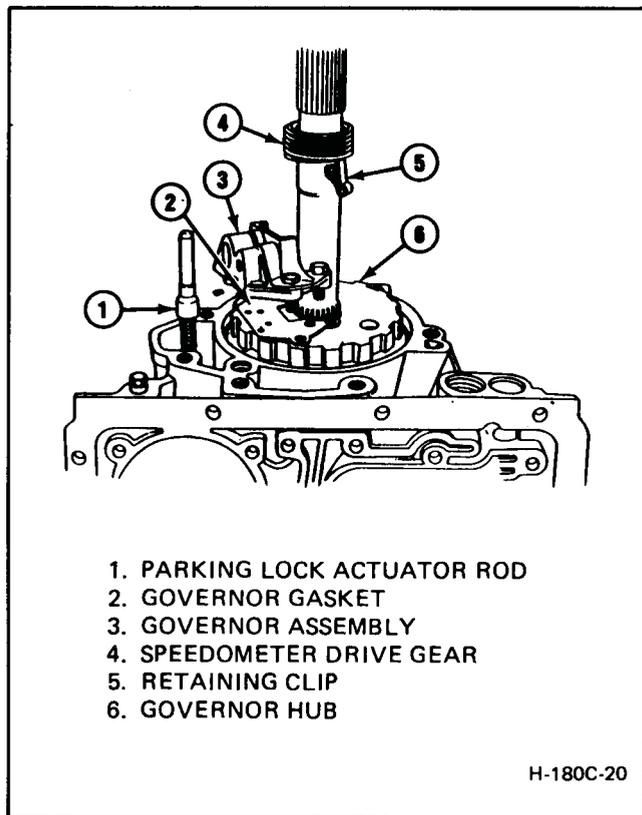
C-73 Installing Governor Body and Speedometer Drive Gear
